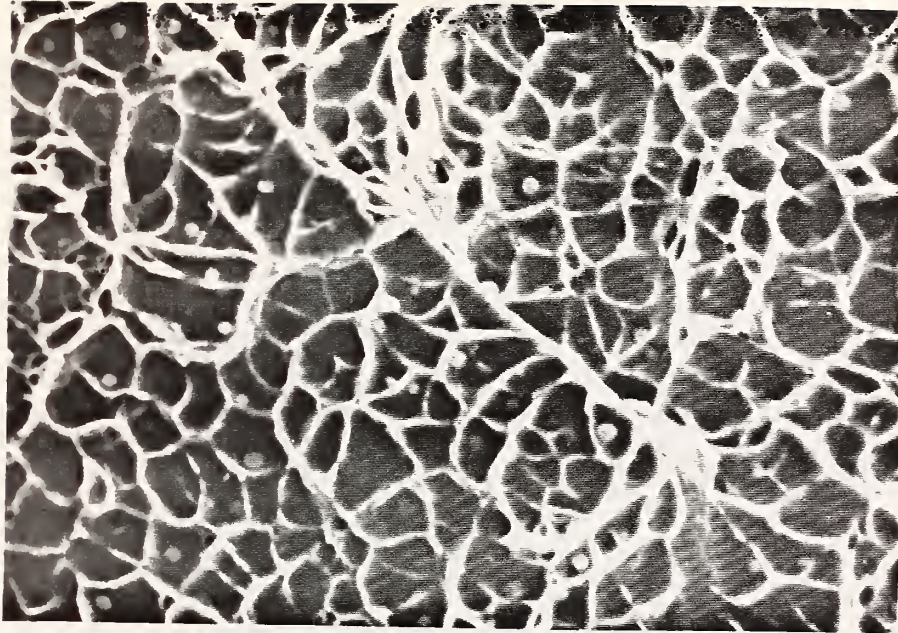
Fractograph taken near the center of a weld 1 tensile specimen. It is representative of the dimple size and morphologies commonly observed.
